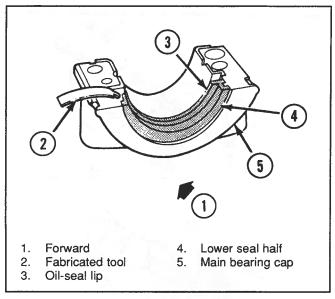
Using Rear Main Seal Installation Tool On Lower Seal
